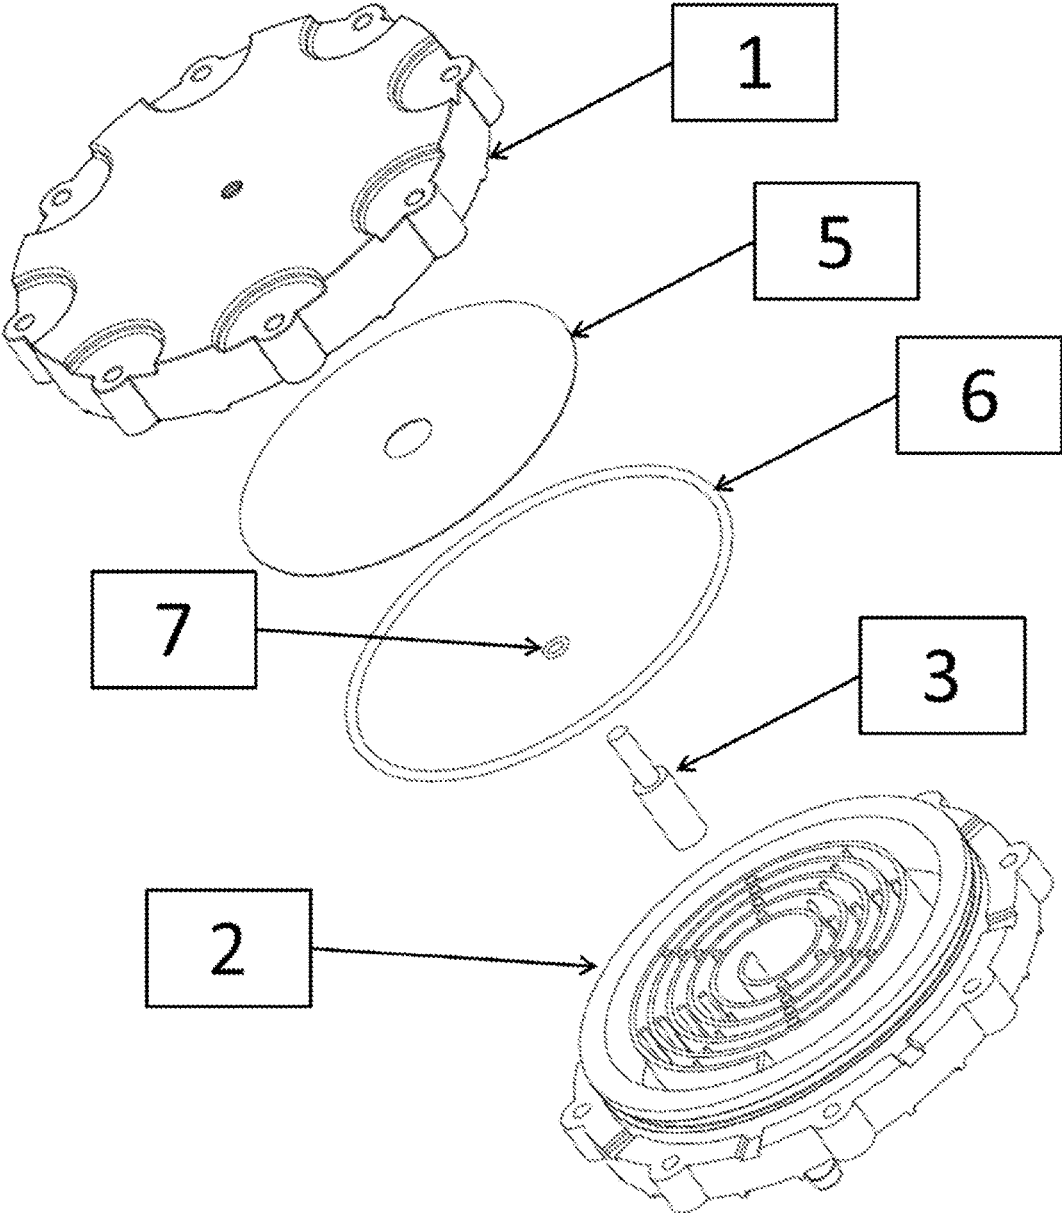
Exploded view of the spiral mixing chamber showing all of its components.
